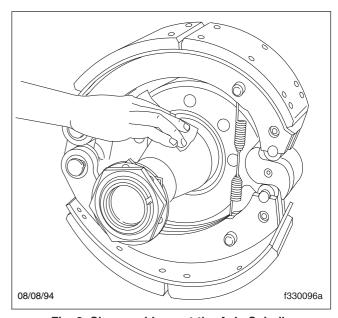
, Clean and Inspect the Axle Spindle
